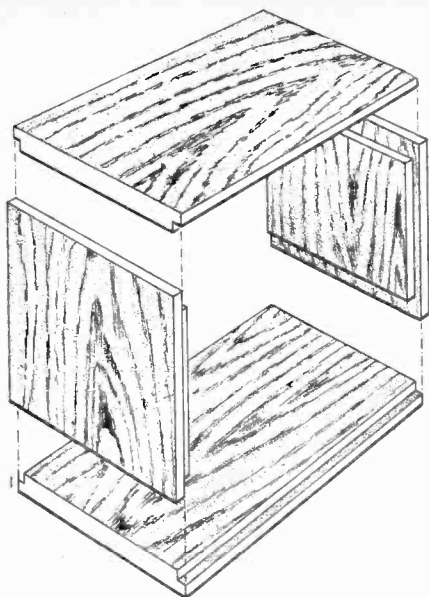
Sides, top and bottom of case having inserted front and back panels.
